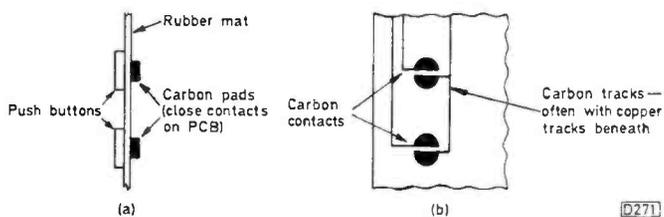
Mat contact assemblies. (a) Contact mat. (b) Section of PCB.
